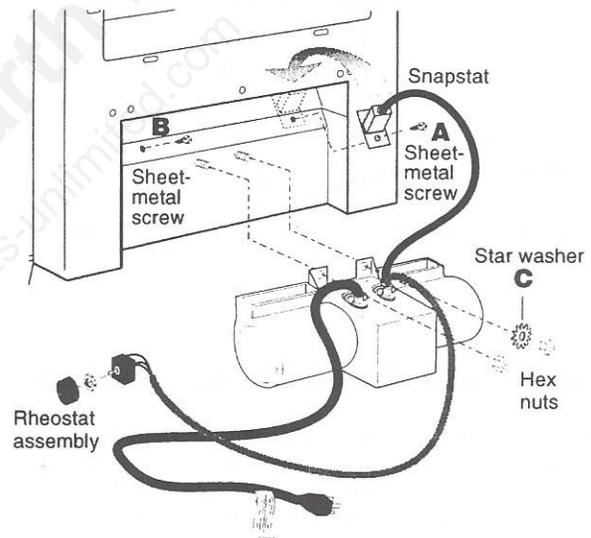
Attach the snapstat and fan assembly to the rear shroud.
